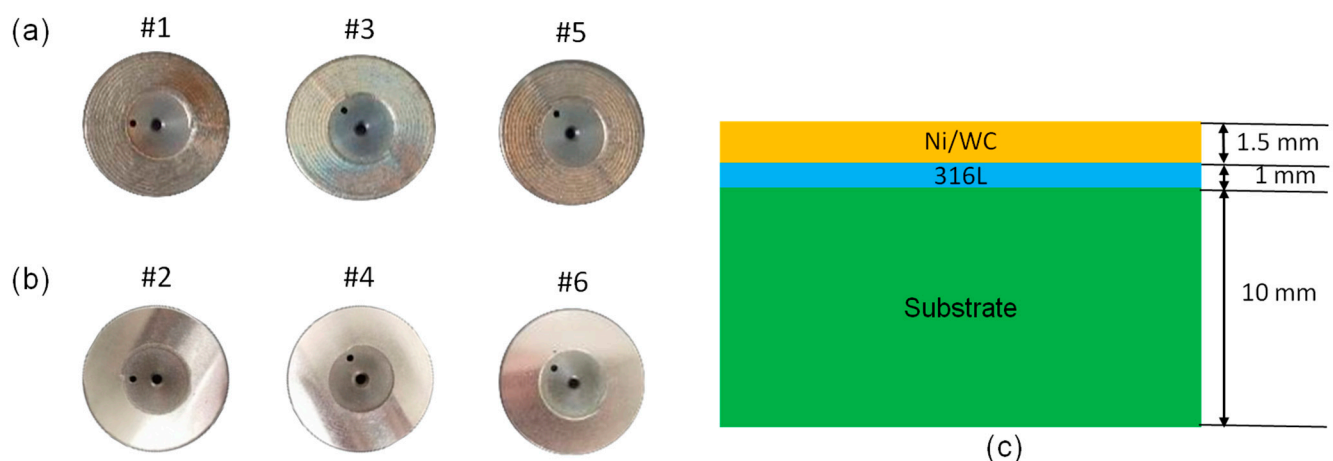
Laser-clad specimens. (a) before surface polishing; (b) after surface polishing; (c) illustration of cross-section through specimen.
